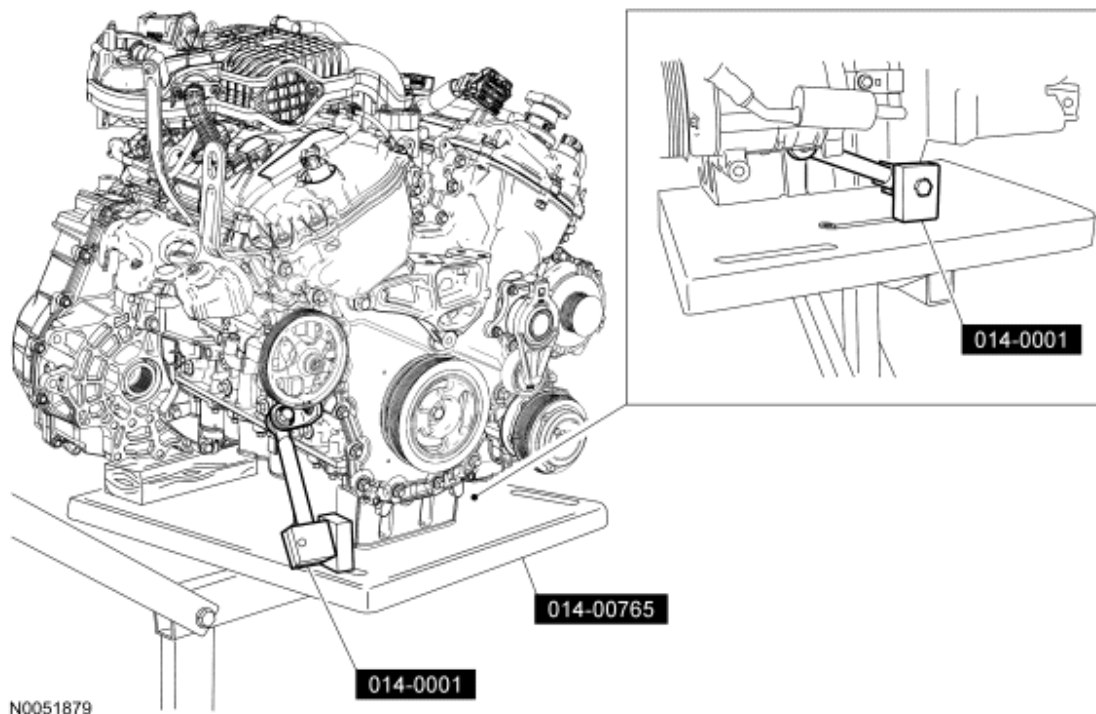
Positioning Block Of Wood Under Transaxle Using Special Tools (014-0001) & (014-00765)
